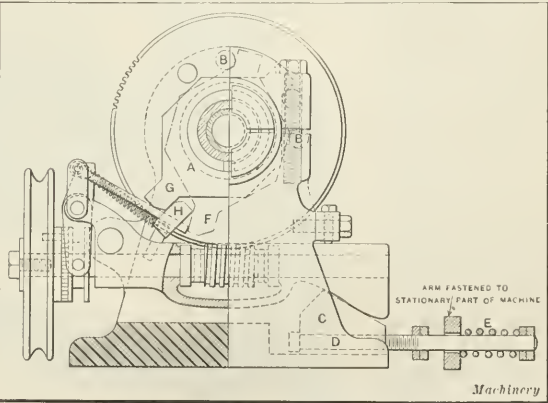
Mechanism of American Ammunition Co.'s Thread Miller, showing Principle of Semi-automatic Operation
